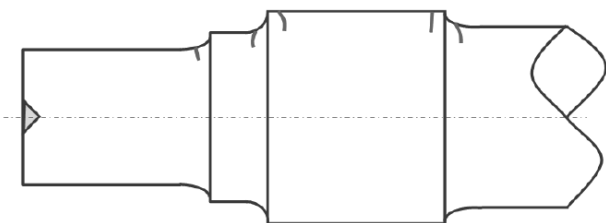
The places of the railway axle most exposed to the occurrence of fatigue cracks [1]
